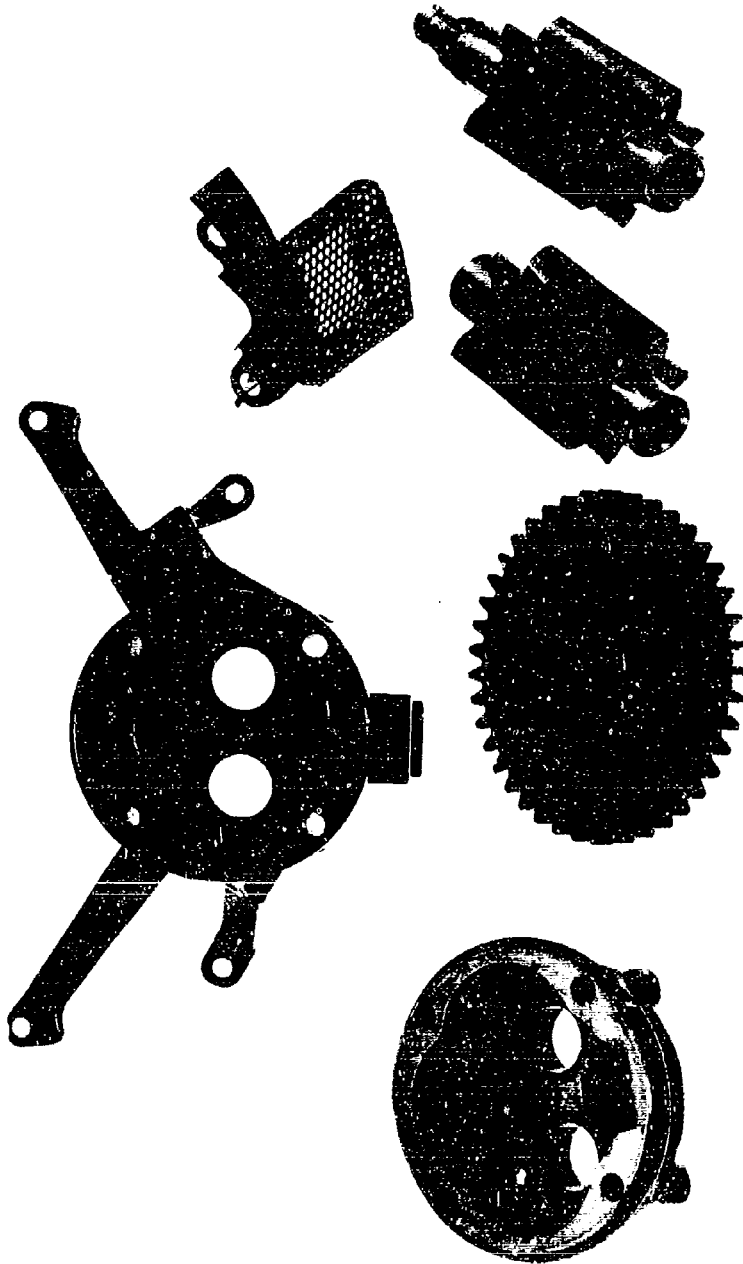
JTF17A-20 No. 4 Compartment Scavenge Pump After Rig Test Showing Condition of the Scavenge Pump Gears and Housing
